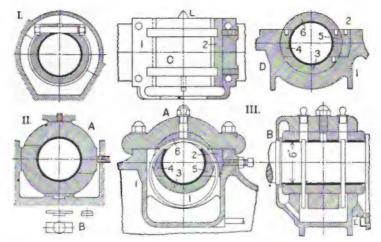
Bearings for High-speed Stationary Engines. I. Detail from Fig. 5; II. Simple bearing in two parts; III. Ring-oiling bearing in four parts.
